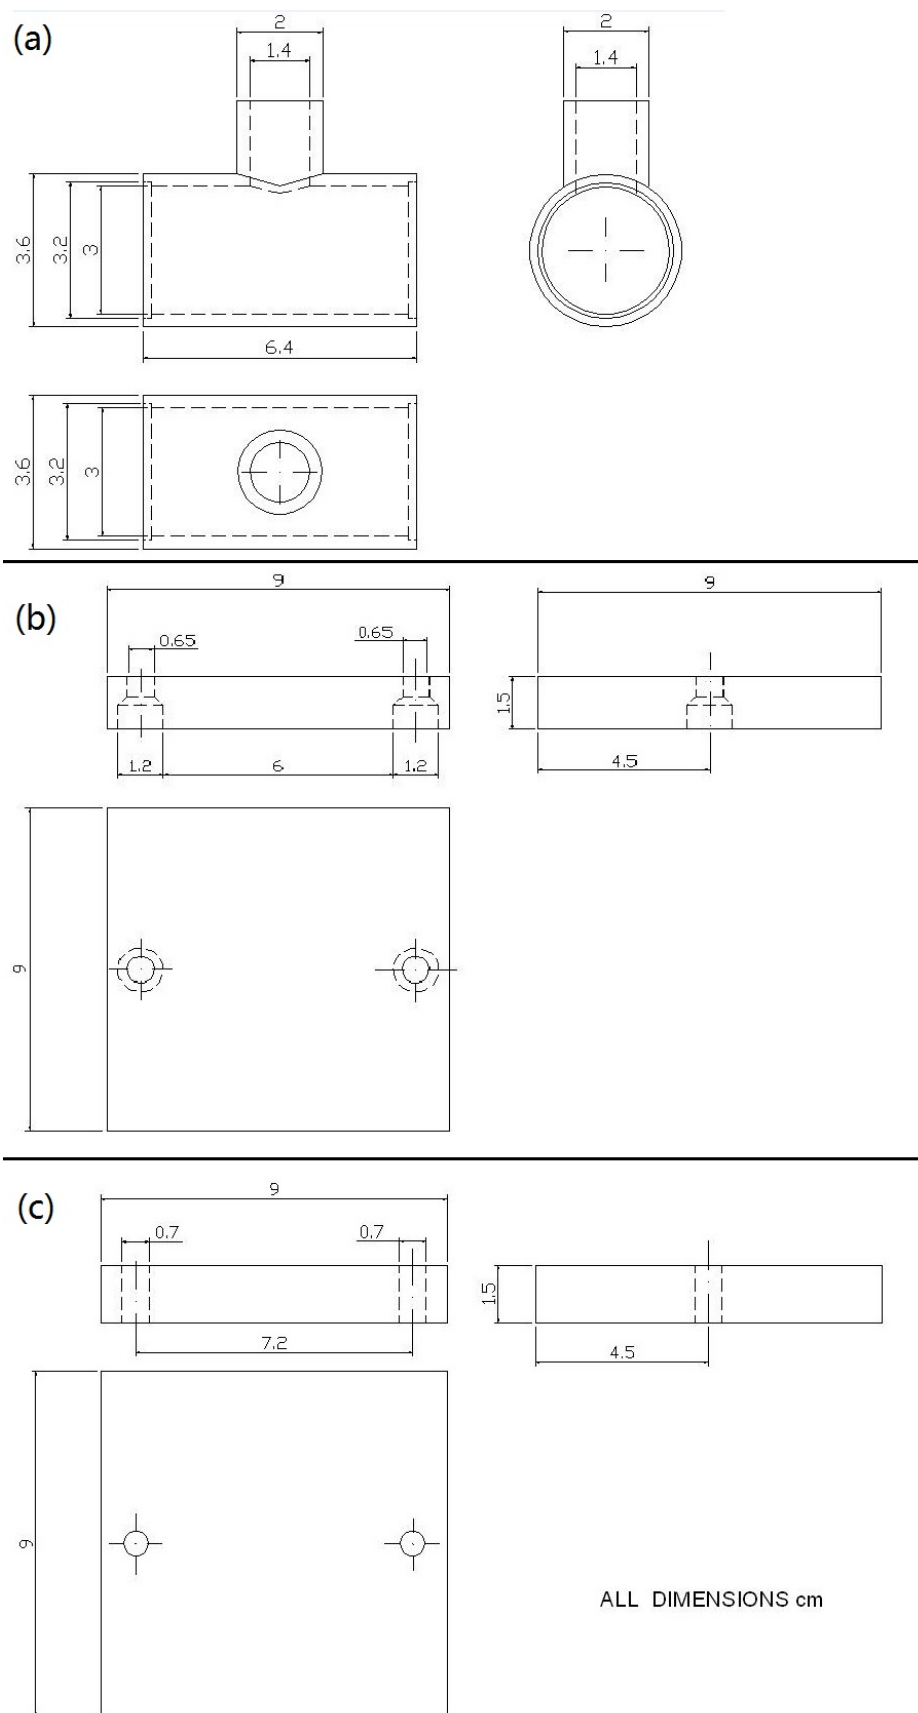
Design of cell apparatus for galvanic corrosion tests (a) a three-way hollow column (b) bottom rectangular end plate (c) top rectangular end plate
